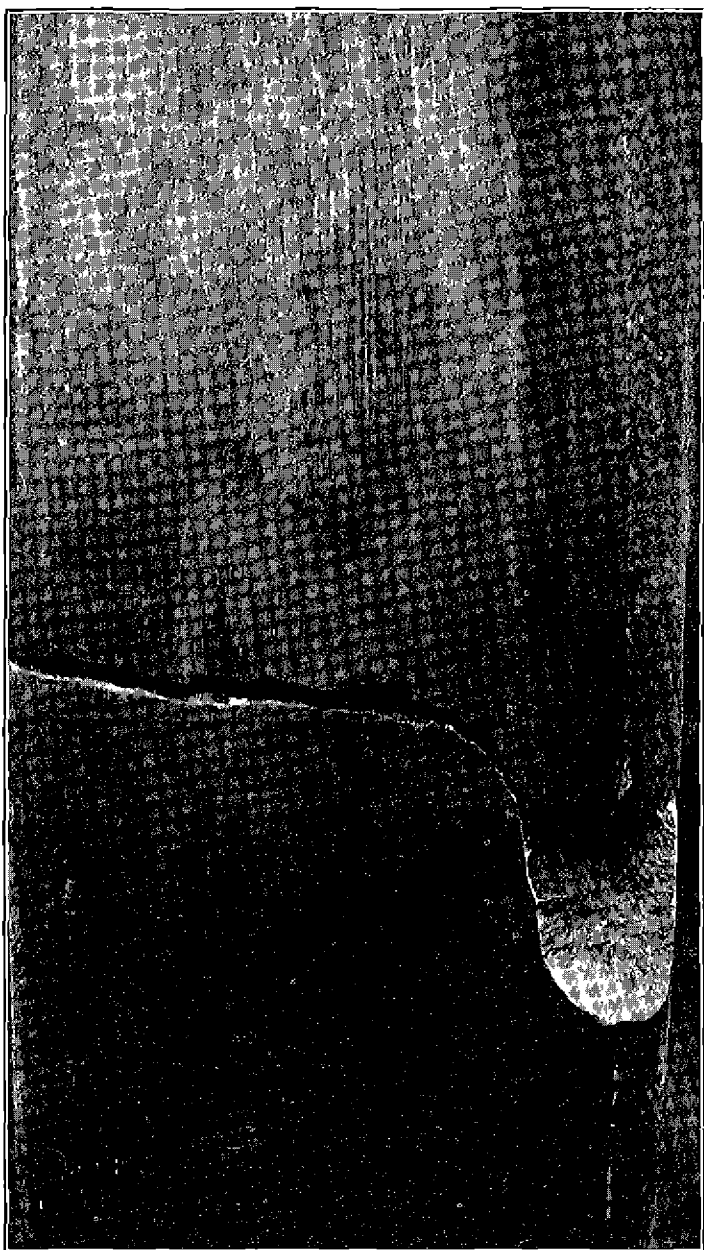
View of tread of broken wheel No 57298, showing line of rupture located at a shd flat spot believed to be the initial point of rupture
